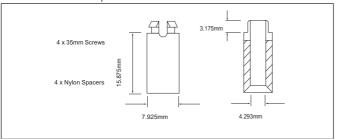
Board holder, punch version ( $\emptyset$  4.3mm), sheet metal, for 64PXL Board 2.0, 16PXL Board 2.0 and 16PXL Strip 2.0
